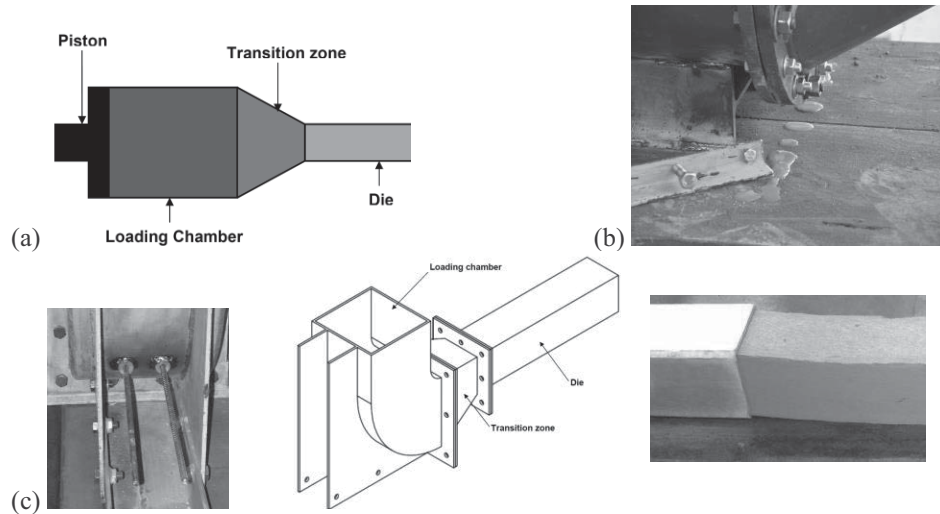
Piston-type extrusion shown (a) a piston extruder schematically, (b), pressure build-up and consequentially paste water drops only extruding, (c) a piston extruder with provision for steel reinforcement feeding into the extrudate (Visser 2007).
